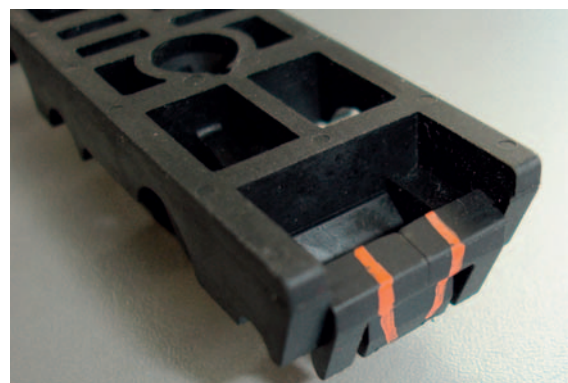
Weld at the flow-path end of a cable fastener
